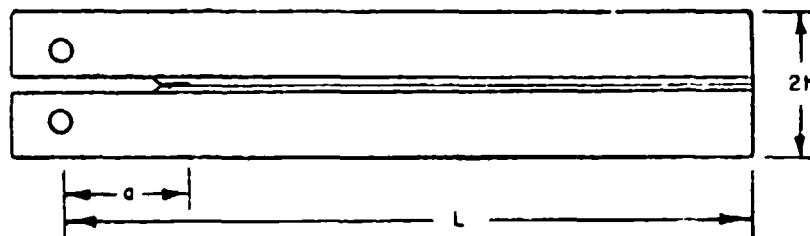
Double Cantilever Beam (DCB) Specimen with Side Grooves.
